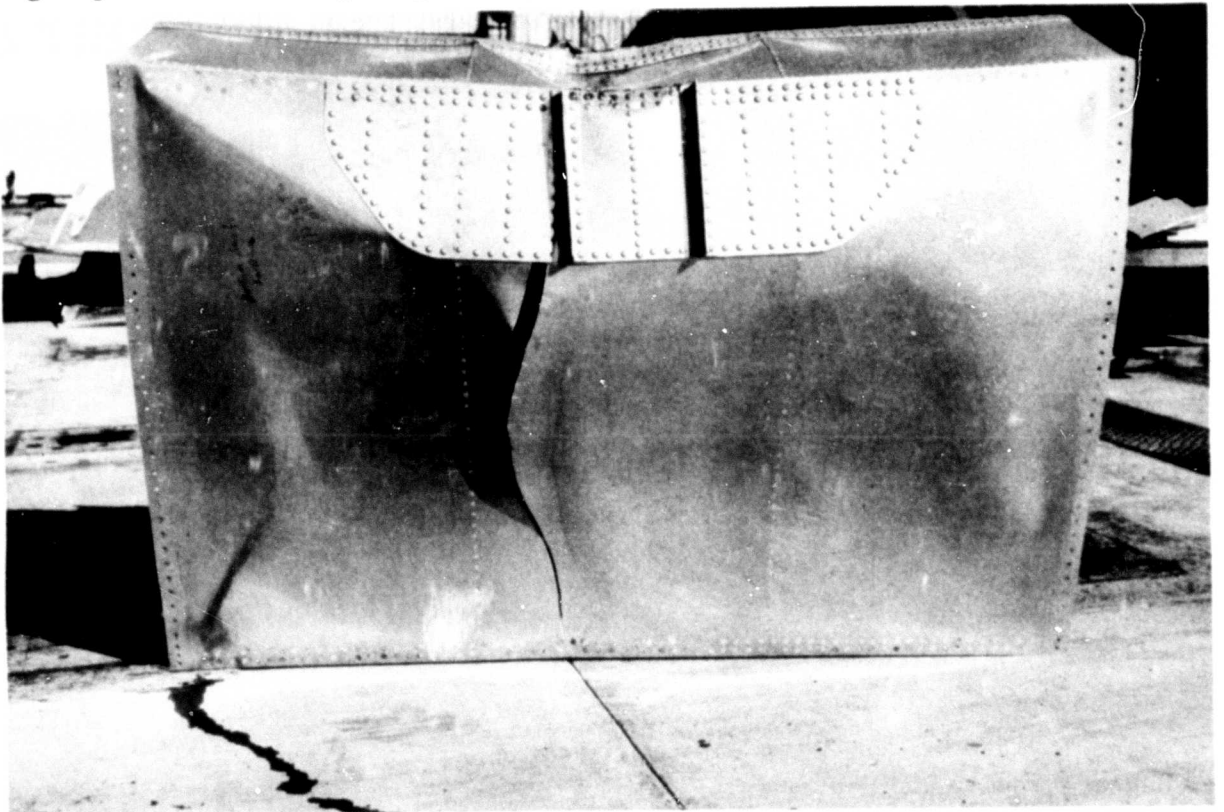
Failure of Tank No. 2. Lower surface shown; note bending failure of doubler.
